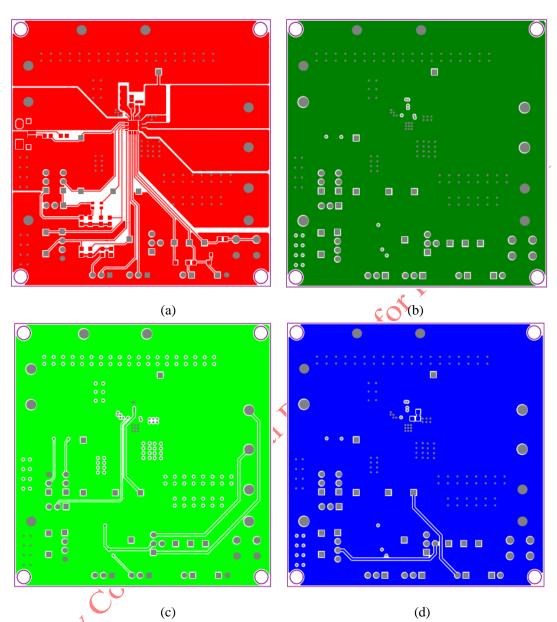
PCB Layout Plots: (a) Top layer, (b) Middle layer 1, (c) Middle layer 2, (d) Bottom layer,
